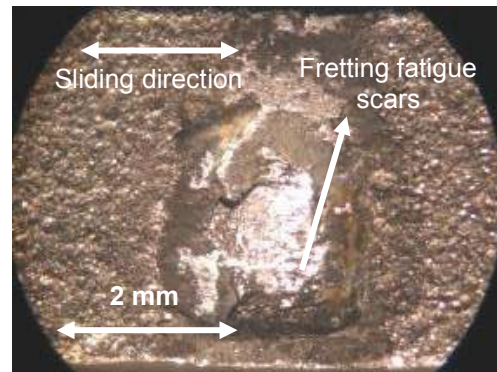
Deep pitting in the contact zone of two specimens under fretting fatigue conditions [3].
